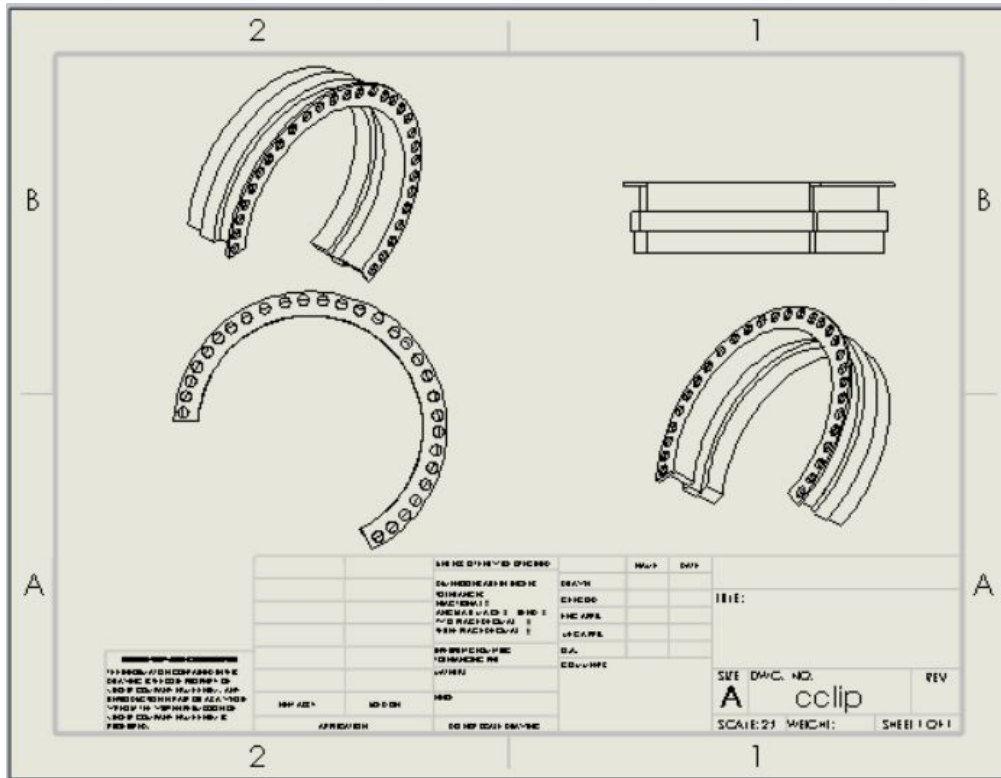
Solidworks Drawing of top, side, and isometric views of the C Clip design.
